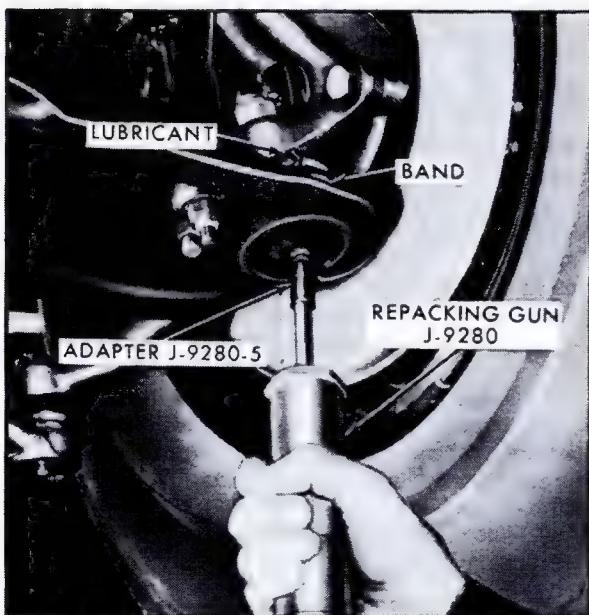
Repacking Front Lower Spherical Joint Seal
